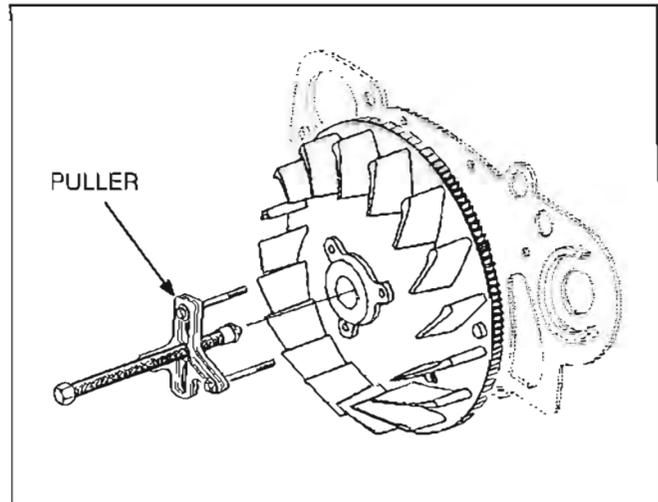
PULLING THE FAN HUB ASSEMBLY
